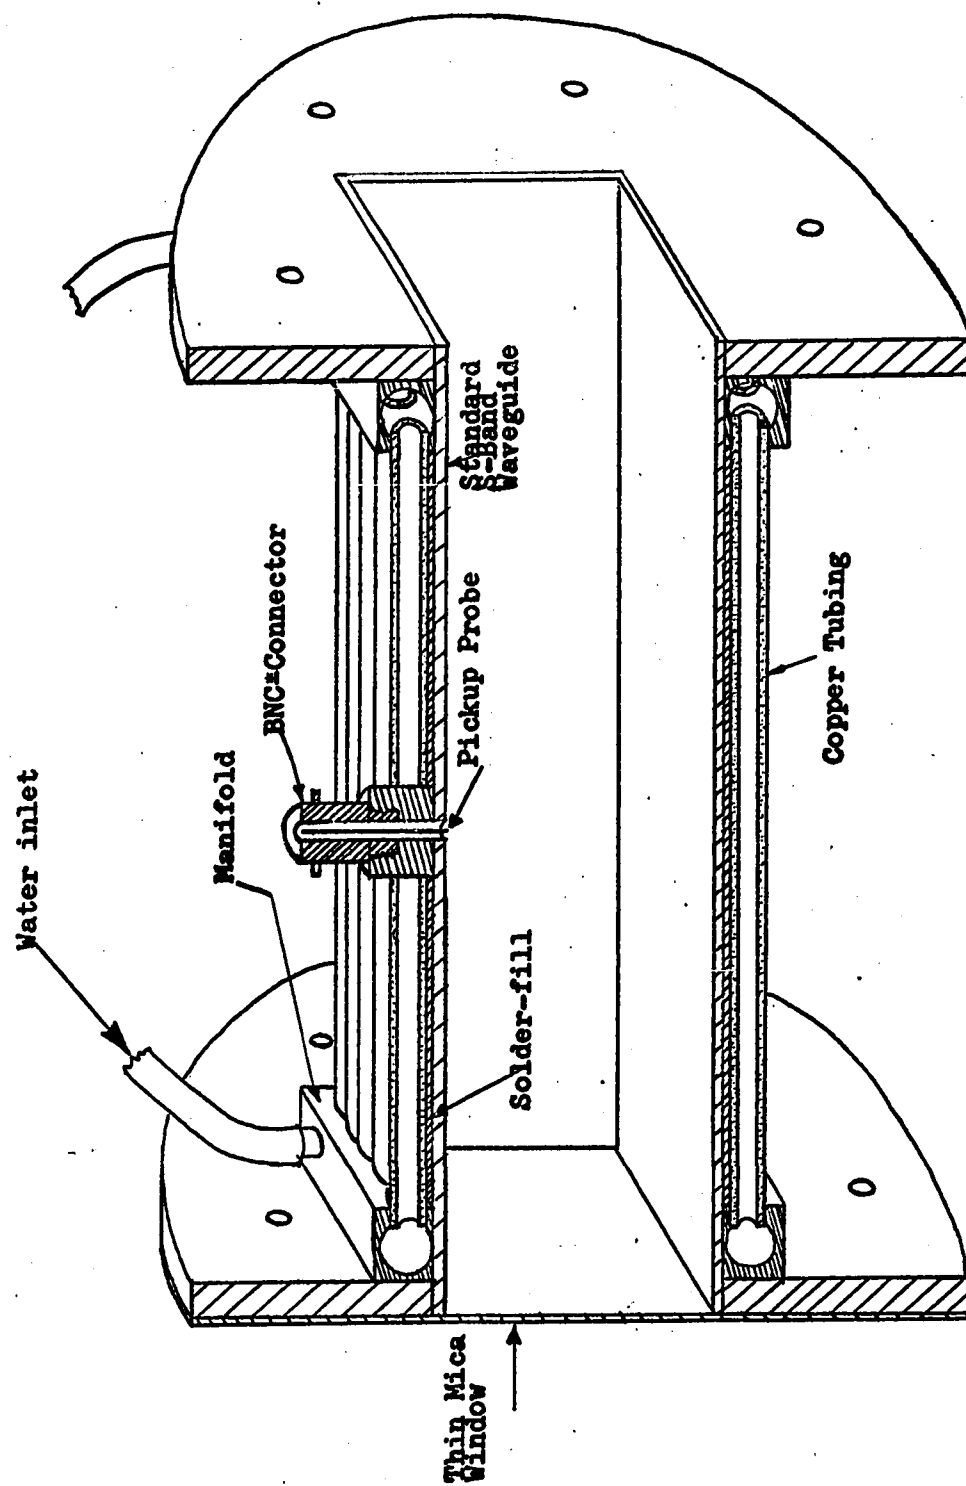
Sample Mount Sketch Showing Cooling Jacket and Probe.
